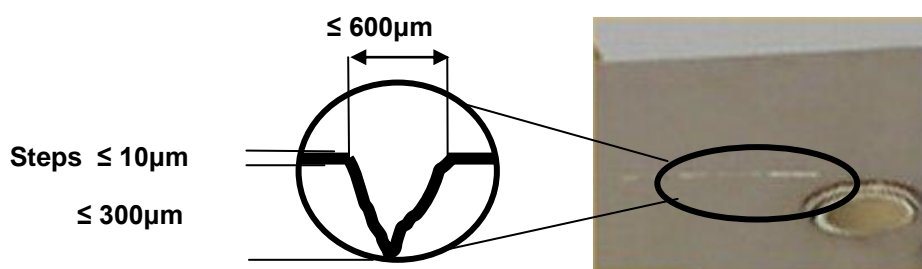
Scratches on the MiniSKiiP® bottom surface
